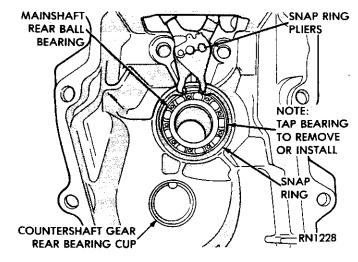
Mainshaft Rear Bearing Replacement TRANSMISSION ASSEMBLY
